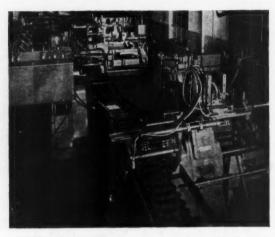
Three KDM-11/70 machines, for machining transmission shafts, linked together by a fully automatic indexing conveyor, and a shuttle-type loading and unloading device.
